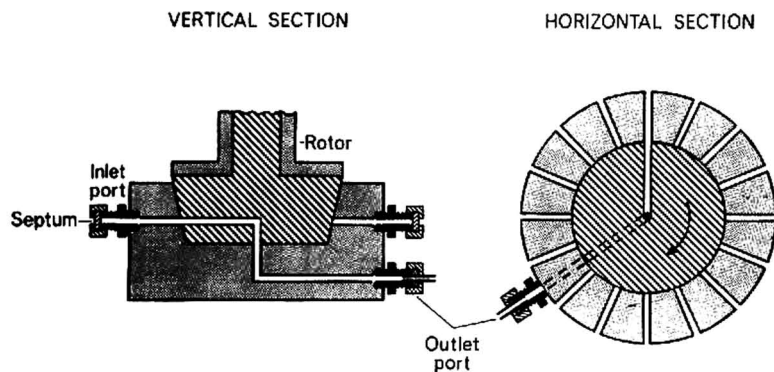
Rotary valve of automatic gas-injection apparatus. The tapered end of the rotor is made of PTFE, and is fixed to a brass shaft; the body of the valve is brass. The sixteen inlet ports (not shown in the horizontal section) are made from Simplifix stainless steel couplings for 1.6 mm O.D. tubing, and fitted with latex rubber septa 1 mm thick.
